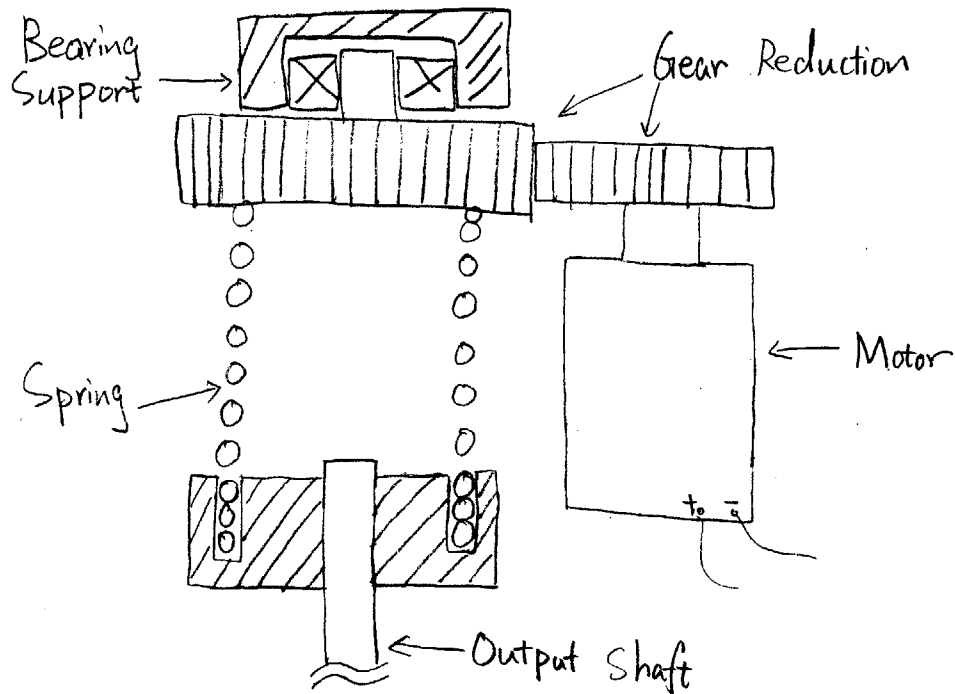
Spring packaging design concept 1: spring in parallel with the driver motor. A gear pair is used to connect between the motor and the spring.
